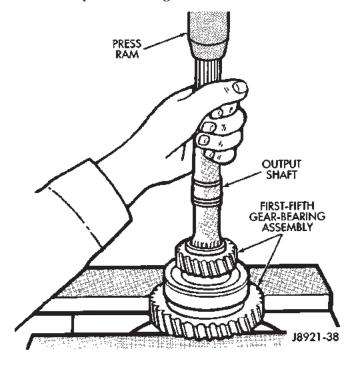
Remove Fifth Gear, First Gear Bearing, And Race
